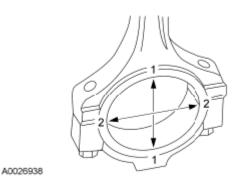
Identifying Connecting Rod Large End Bore Measuring Directions
